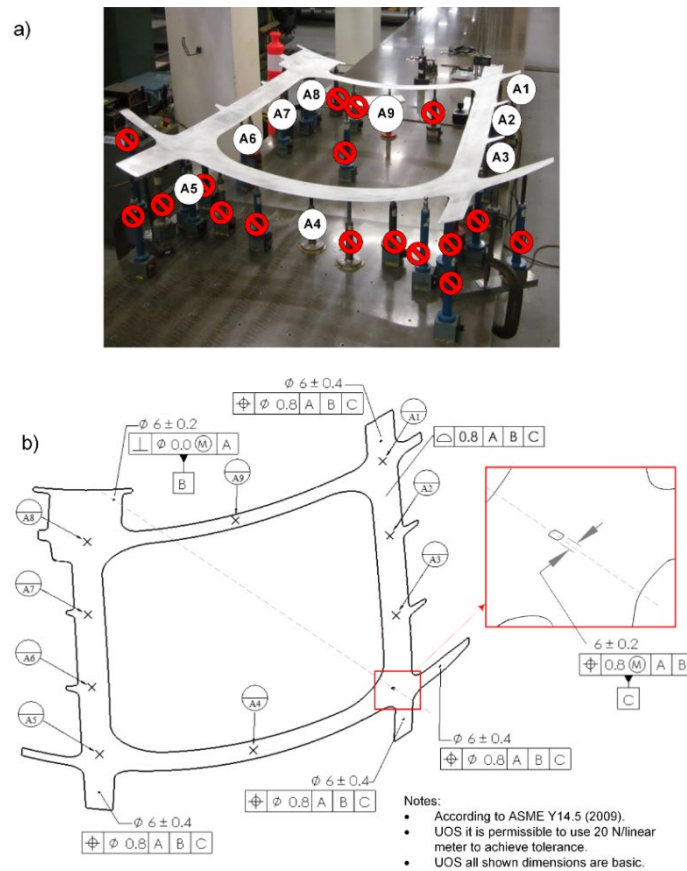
a) Non-rigid panel mounted on inspection fixtures; b) GD&T specification [4].
